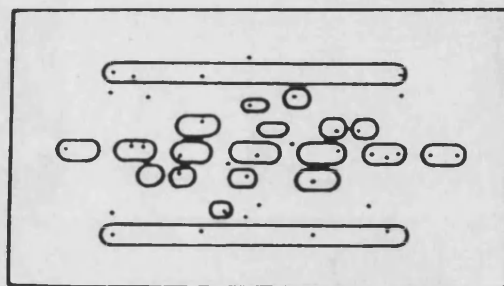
Layout of connection between the components, of the LD drive circuit shown in Figure 4.3, on PCB
